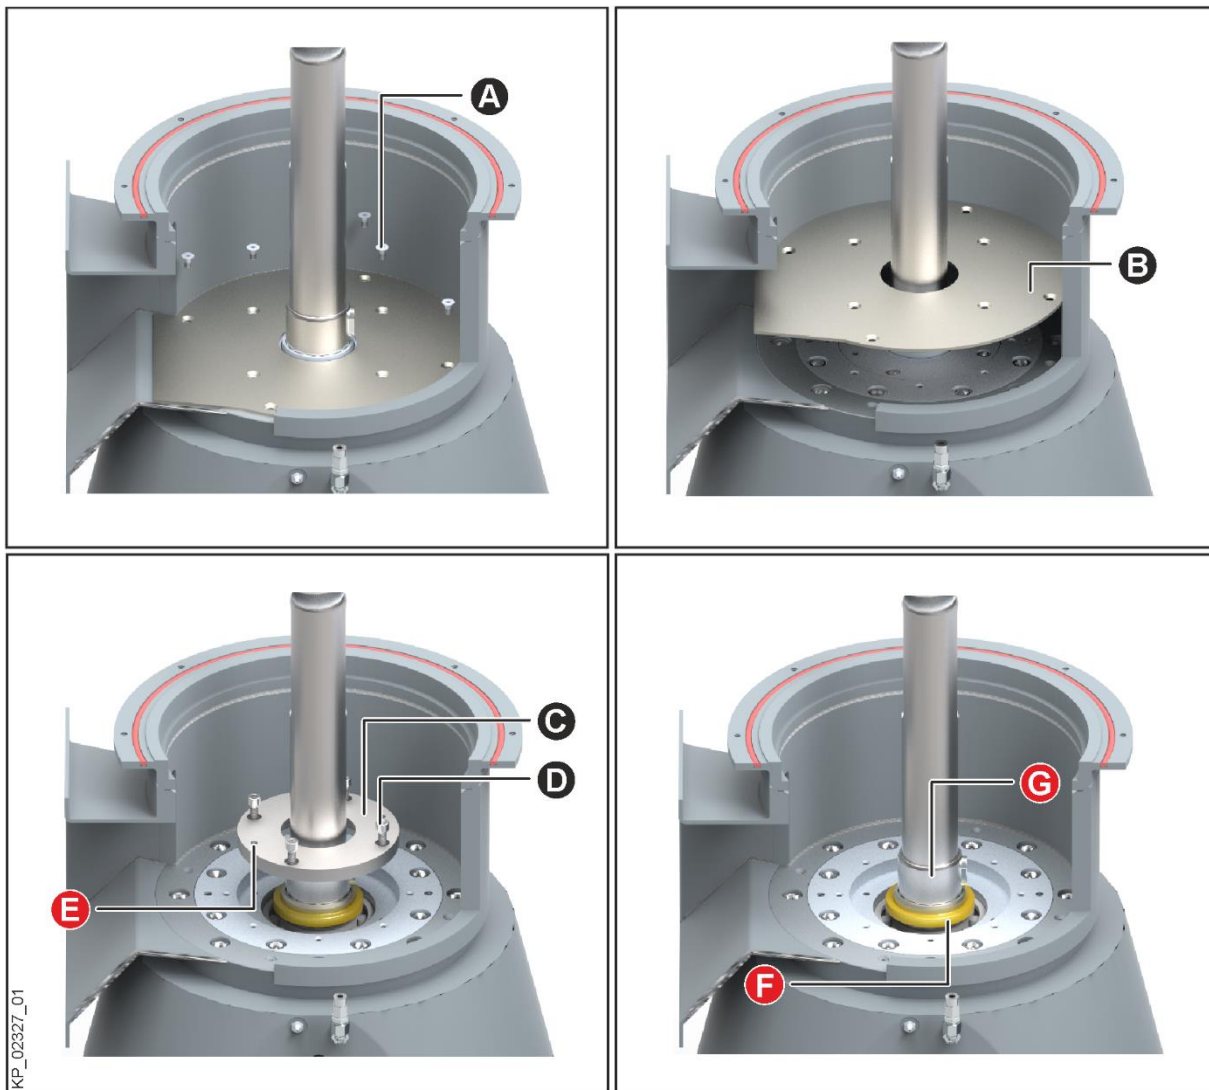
Overview of the centre part with bottom plate and bearing cover
